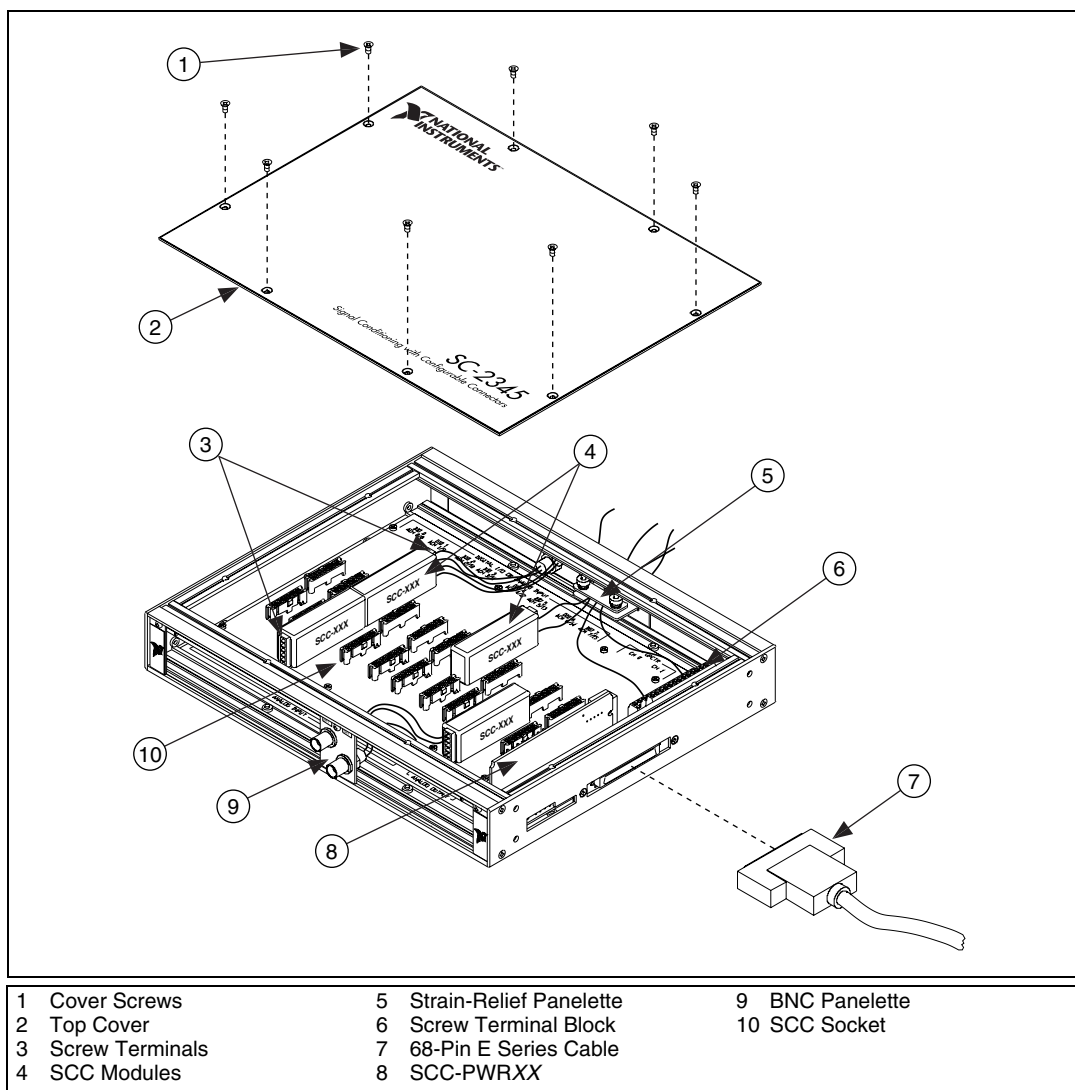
Opening the SC-2345 Configurable Connector (Side Cabled) Enclosure
